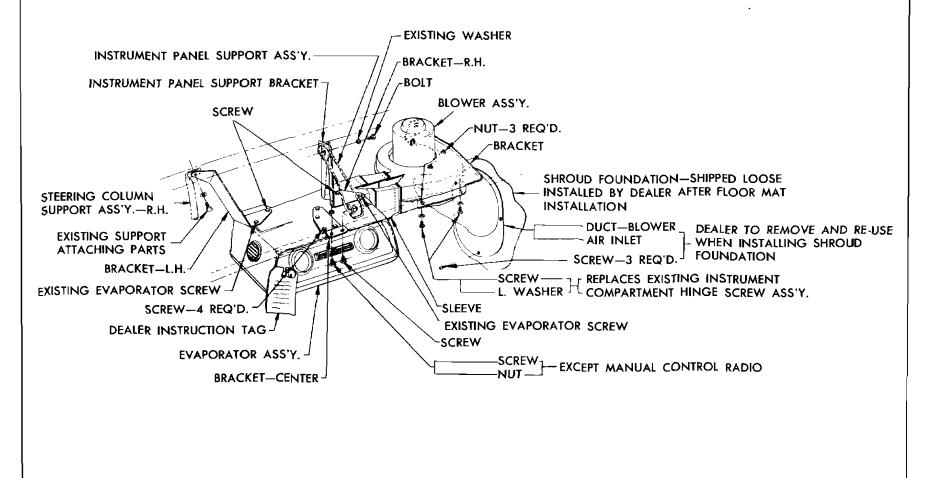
Viewing Evoporator with Lower Pan Removed
